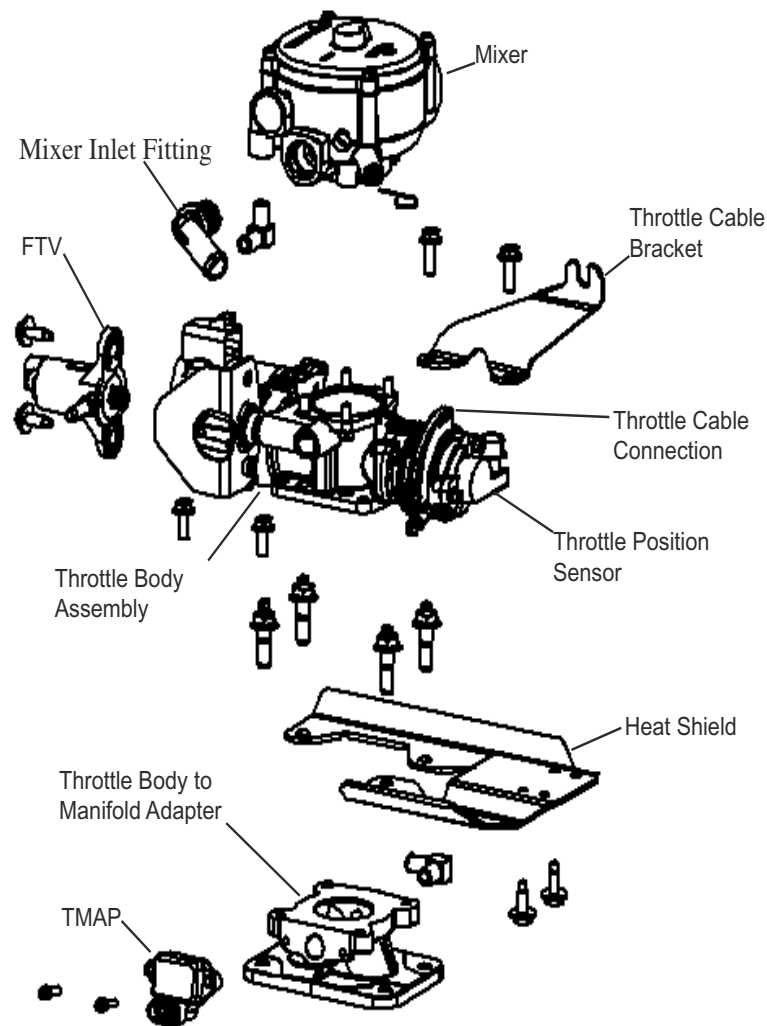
MIXER AND THROTTLE BODY ASSEMBLY
